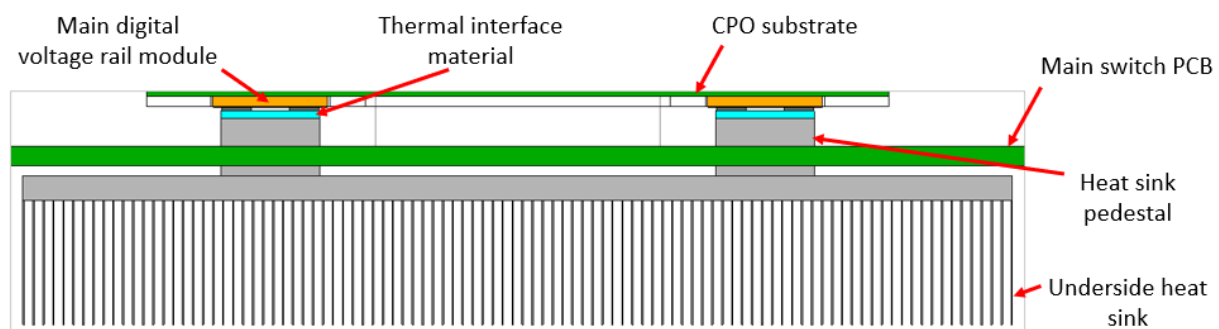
Cross section of a CPO assembly with back-side heatsink for voltage regulators
